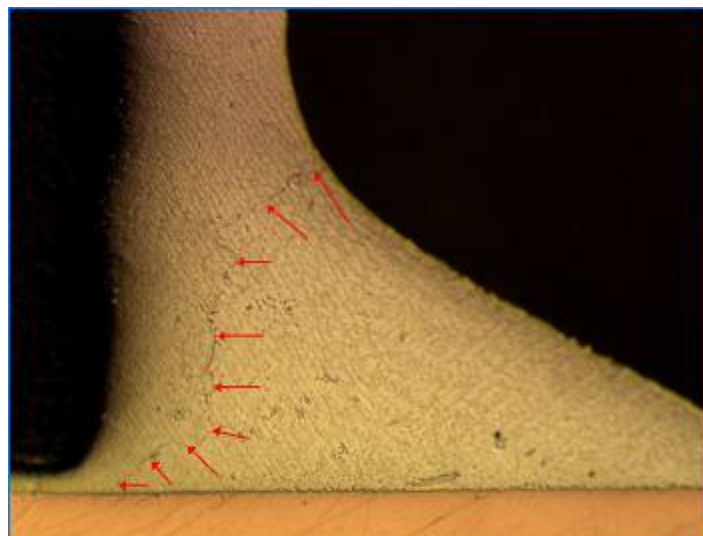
cross section, SN63, U52, right pad solder crack, 100x
